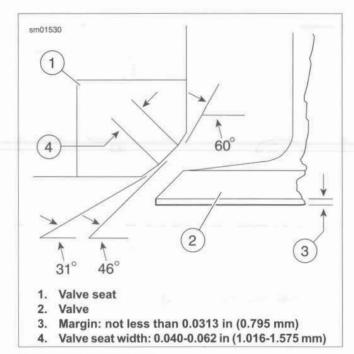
Intake and Exhaust Valve and Seat Dimensions
